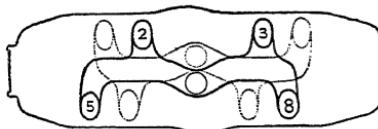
Firing Order—Left-Hand Barrel of Carburetor
